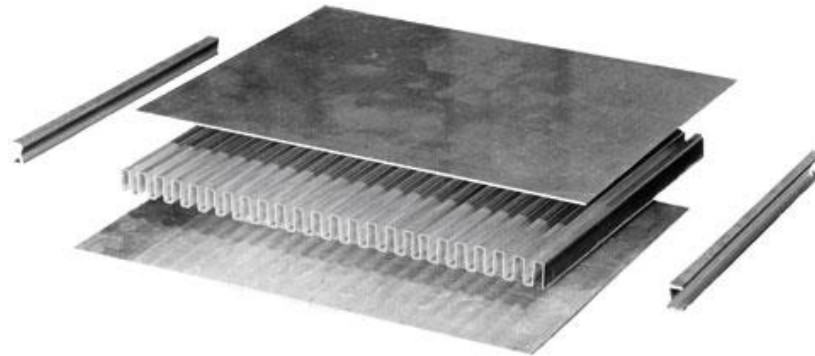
Plate-fin heat exchanger parts (expanded view) [10]
